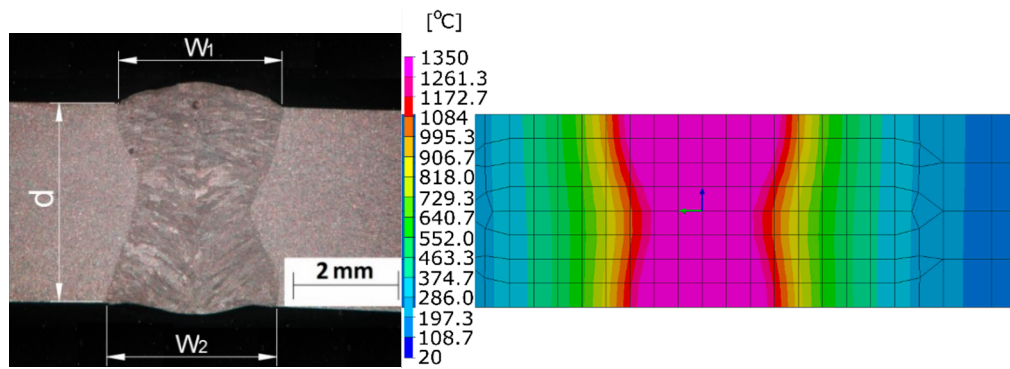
An example of heat source model parameters calibration. Comparison of the calculated shape and size of the molten zone in the laser welding process with a real macrograph of laser weld bead (laser beam power 2000 W, welding speed 0.5 m/min).
